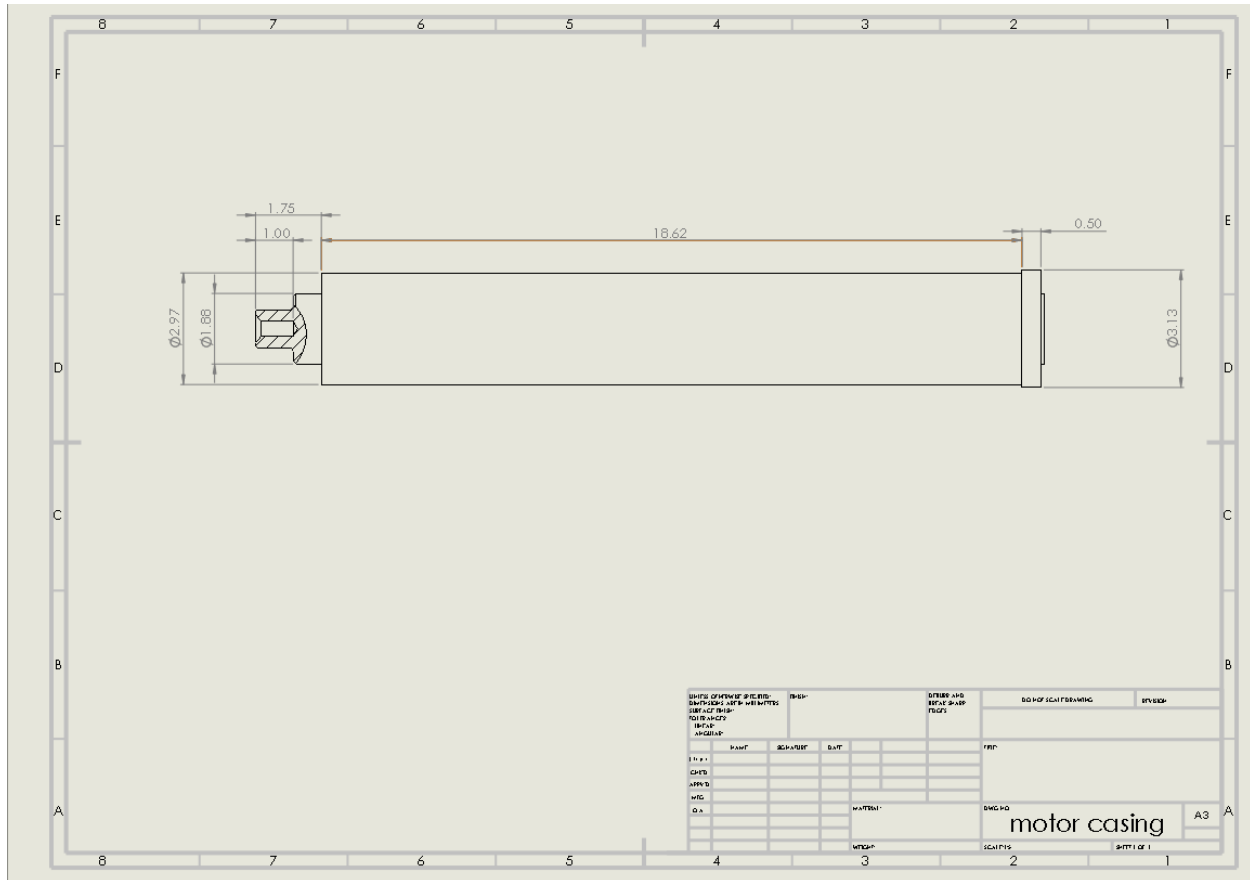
AeroTech Pro75/3840 3G motor casing Dimensions
